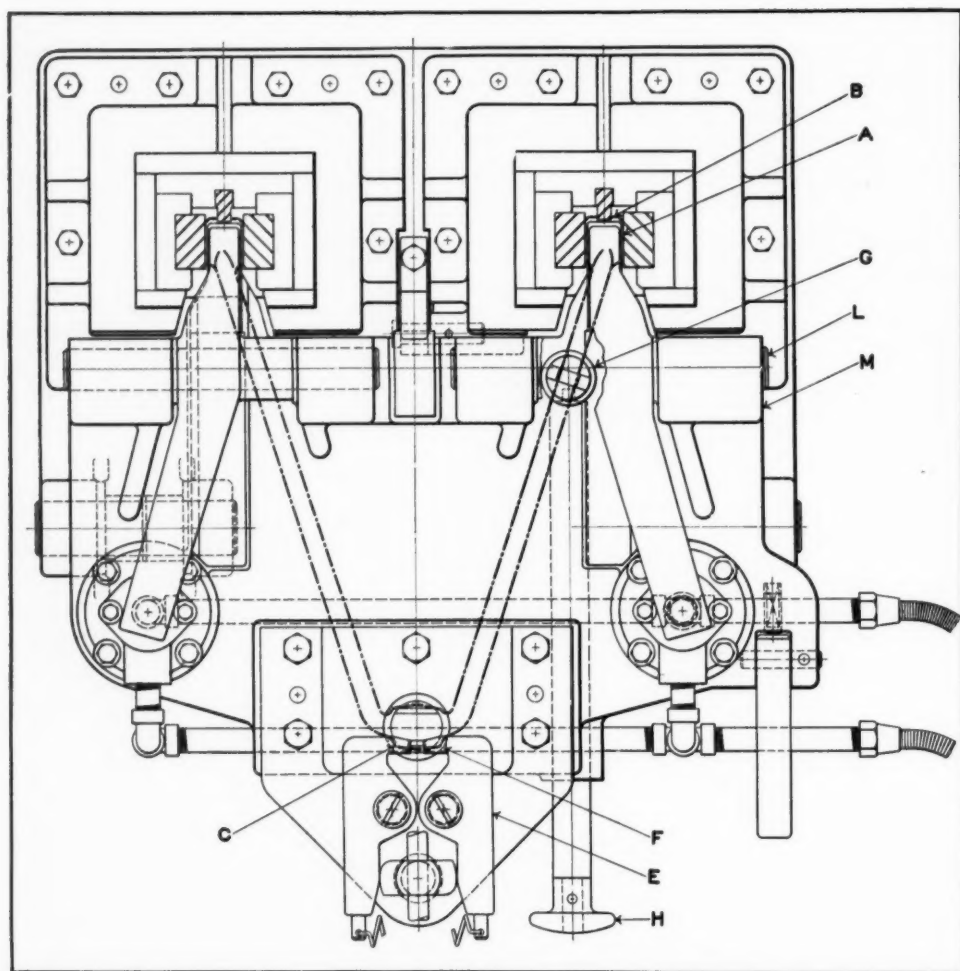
Tilting Type of Fixture Used for Rough- and Finish-broaching Cuts on a Motor Bracket
